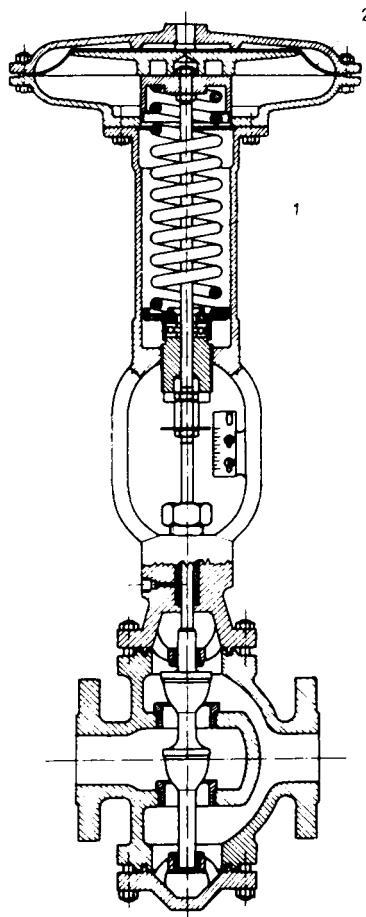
11. Fisher's balanced diaphragm motor valve
